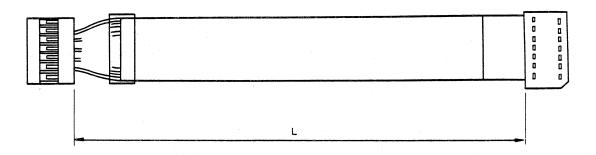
Cable B660-1995-T003A (E501A Panel unit – Drive unit connecting)
